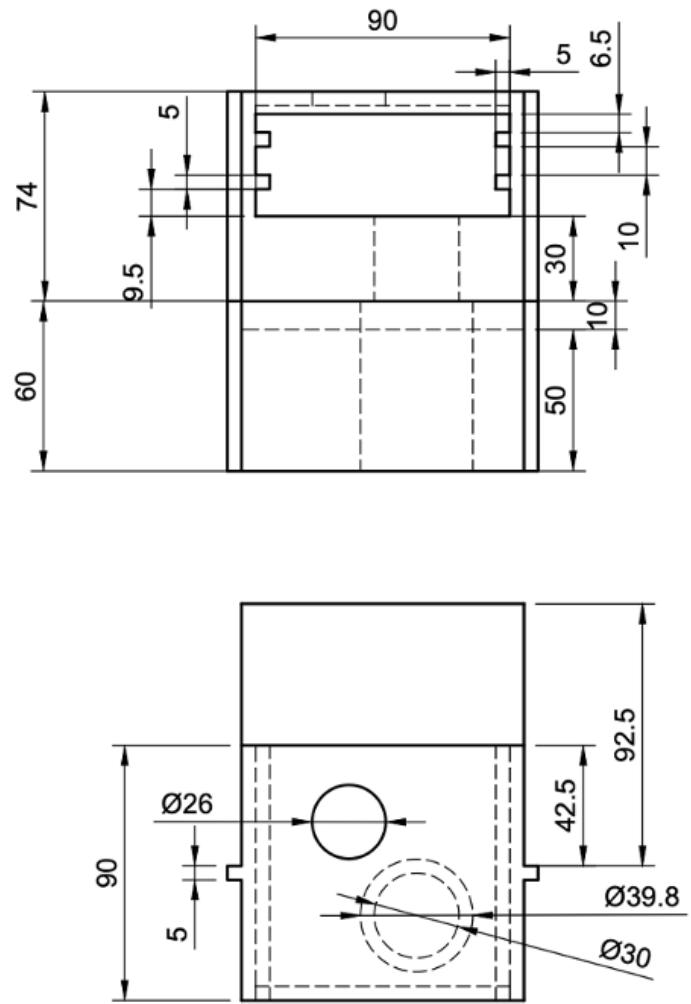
Technical drawings of the gear box (left) and the drill container (right)
